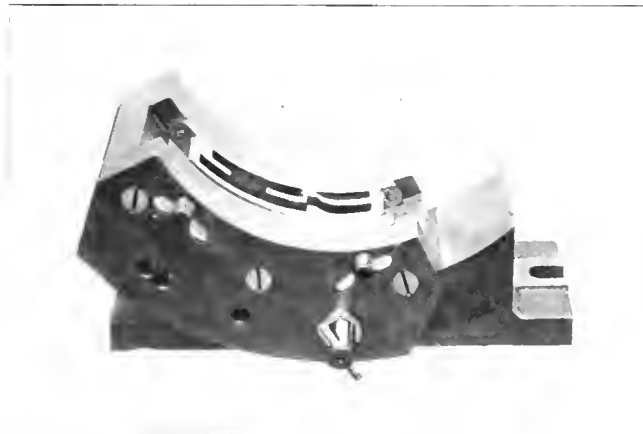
Slotting Fixture for the Quadrant of the Change Gear Lever
